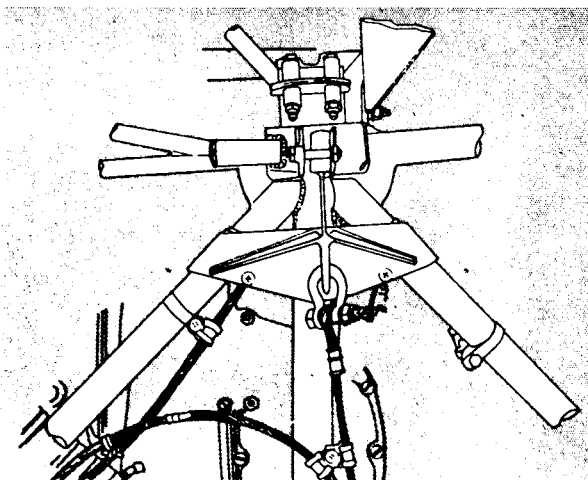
Typical cargo sling installation No. 1 (showing fuselage attachment fitting).
